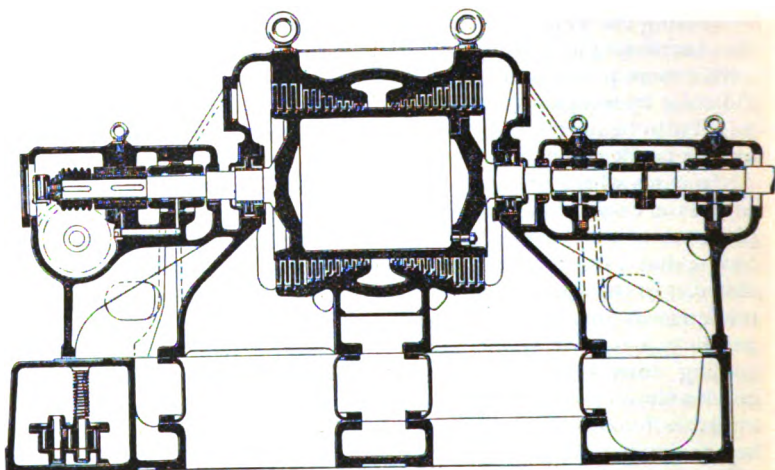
Westinghouse Parsons Exhaust Steam Turbine.
